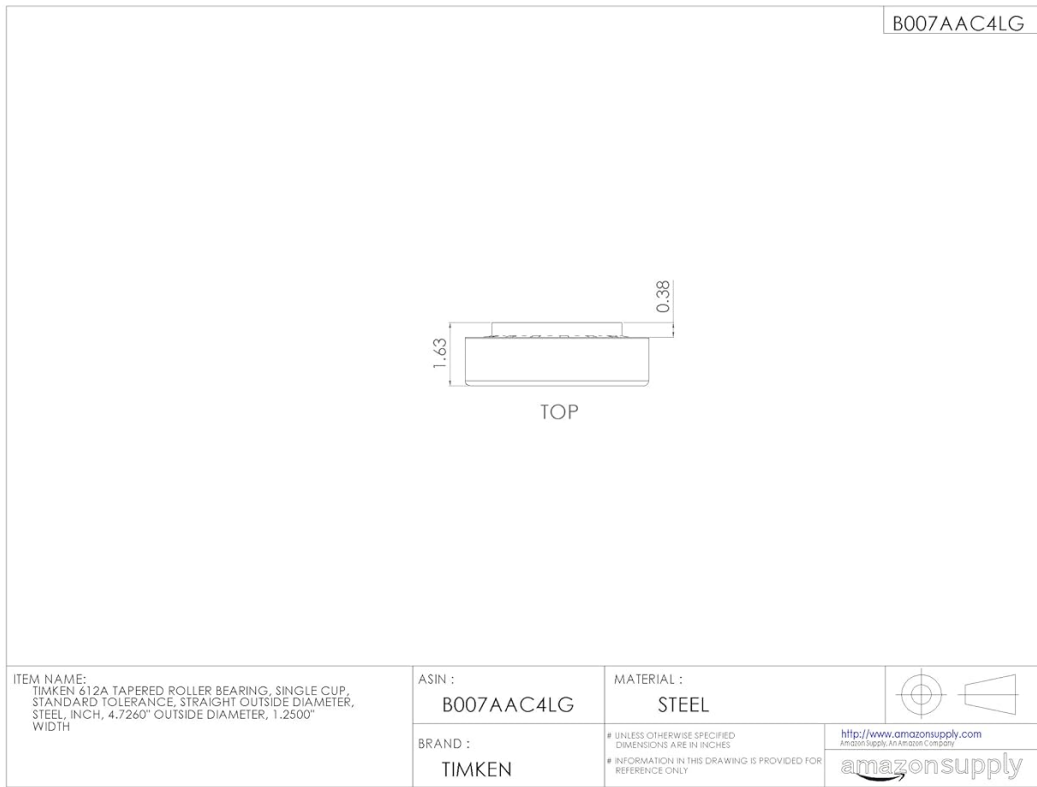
Top View Technical Drawing. Provides an overhead perspective with relevant width measurements.
